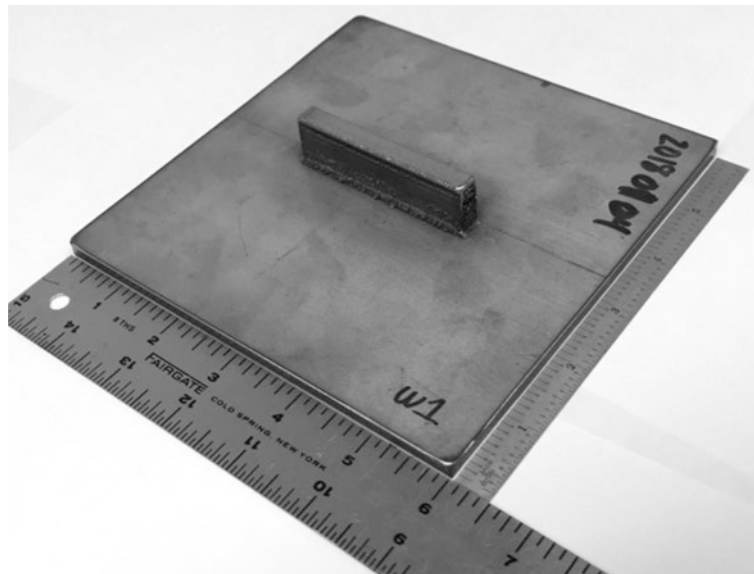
shows rectangular wall W1 built by DED in 304L stainless steel. The baseplate is nominally 6.0 in. (152 mm) square and 0.25 in. (6.4 mm) thick; the wall build is 2.00 in. (50.8 mm) long, 0.38 in. (9.5 mm) wide, and 0.75 in. (19.1 mm) tall along the build direction.
